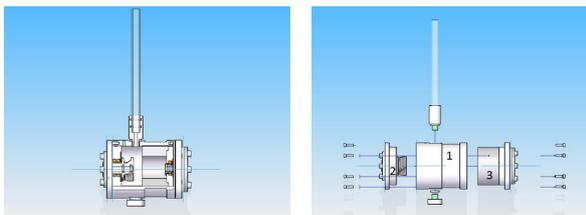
(a) Cross section of the 3D model of the electrodeposition cell (b) exploded view
